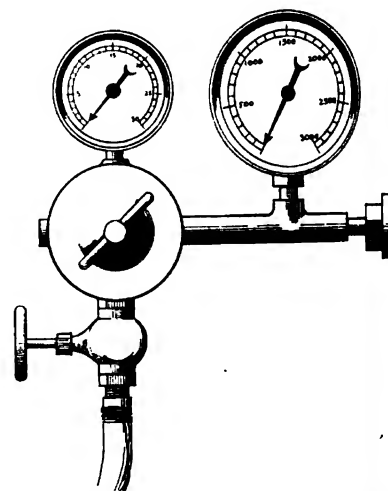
TAKE OFF THE VALVE ON THE REGULATOR
